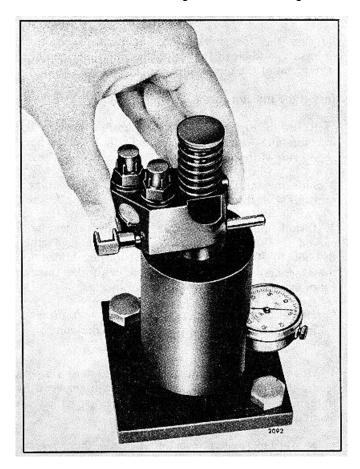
Checking Injector Spray Tip Concentricity using Tool J 5119
